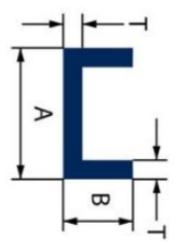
Aluminum Channel Section Details Note: A=20mm, B=20mm & T=1.6mm
